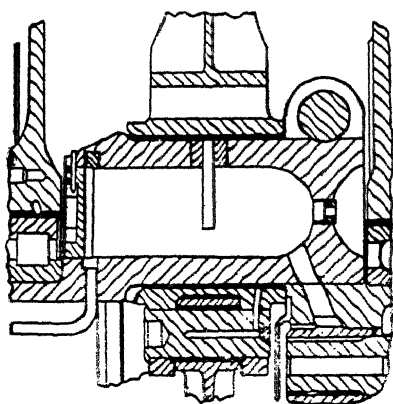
Sludge trap in crankpin master rod bearing of radial engine.
